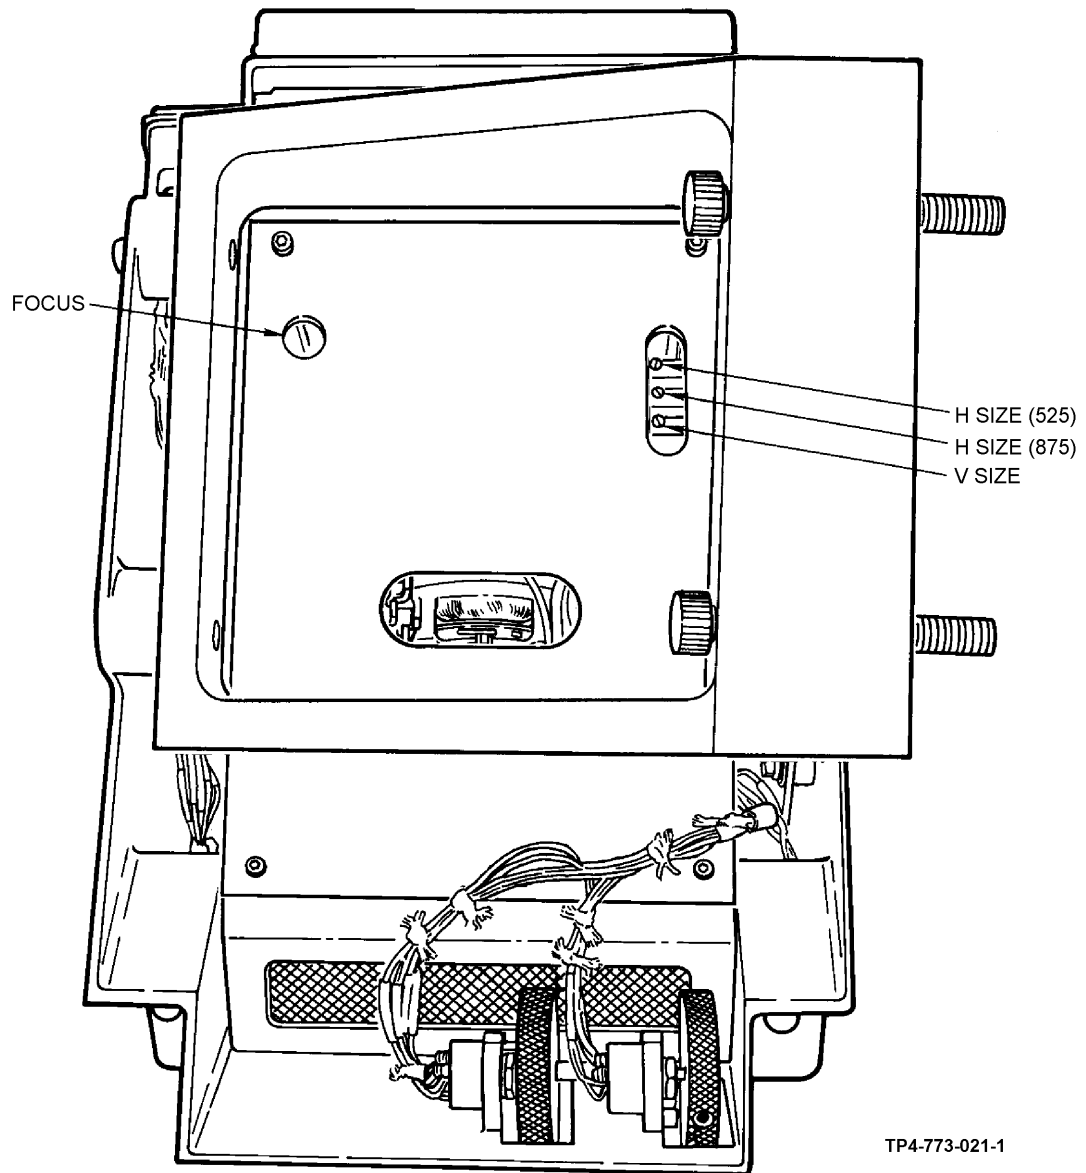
Control Panel Assembly with Mounting Bracket and Adjustment Cover Installed
